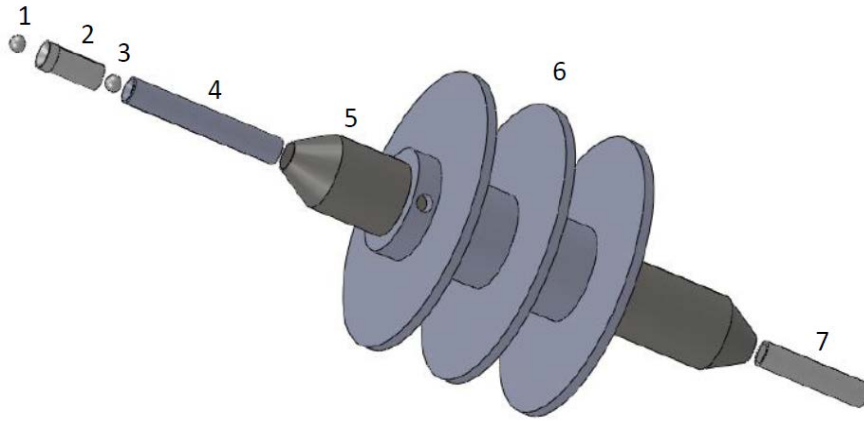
Exploded view of the magnetic circulation pump: (1) upper ruby ball; (2) fixed check valve body; (3) lower ruby ball ball; (4) magnet piston; (5) pump cylinder; (6) bobbin; (7) stainless steel support.
